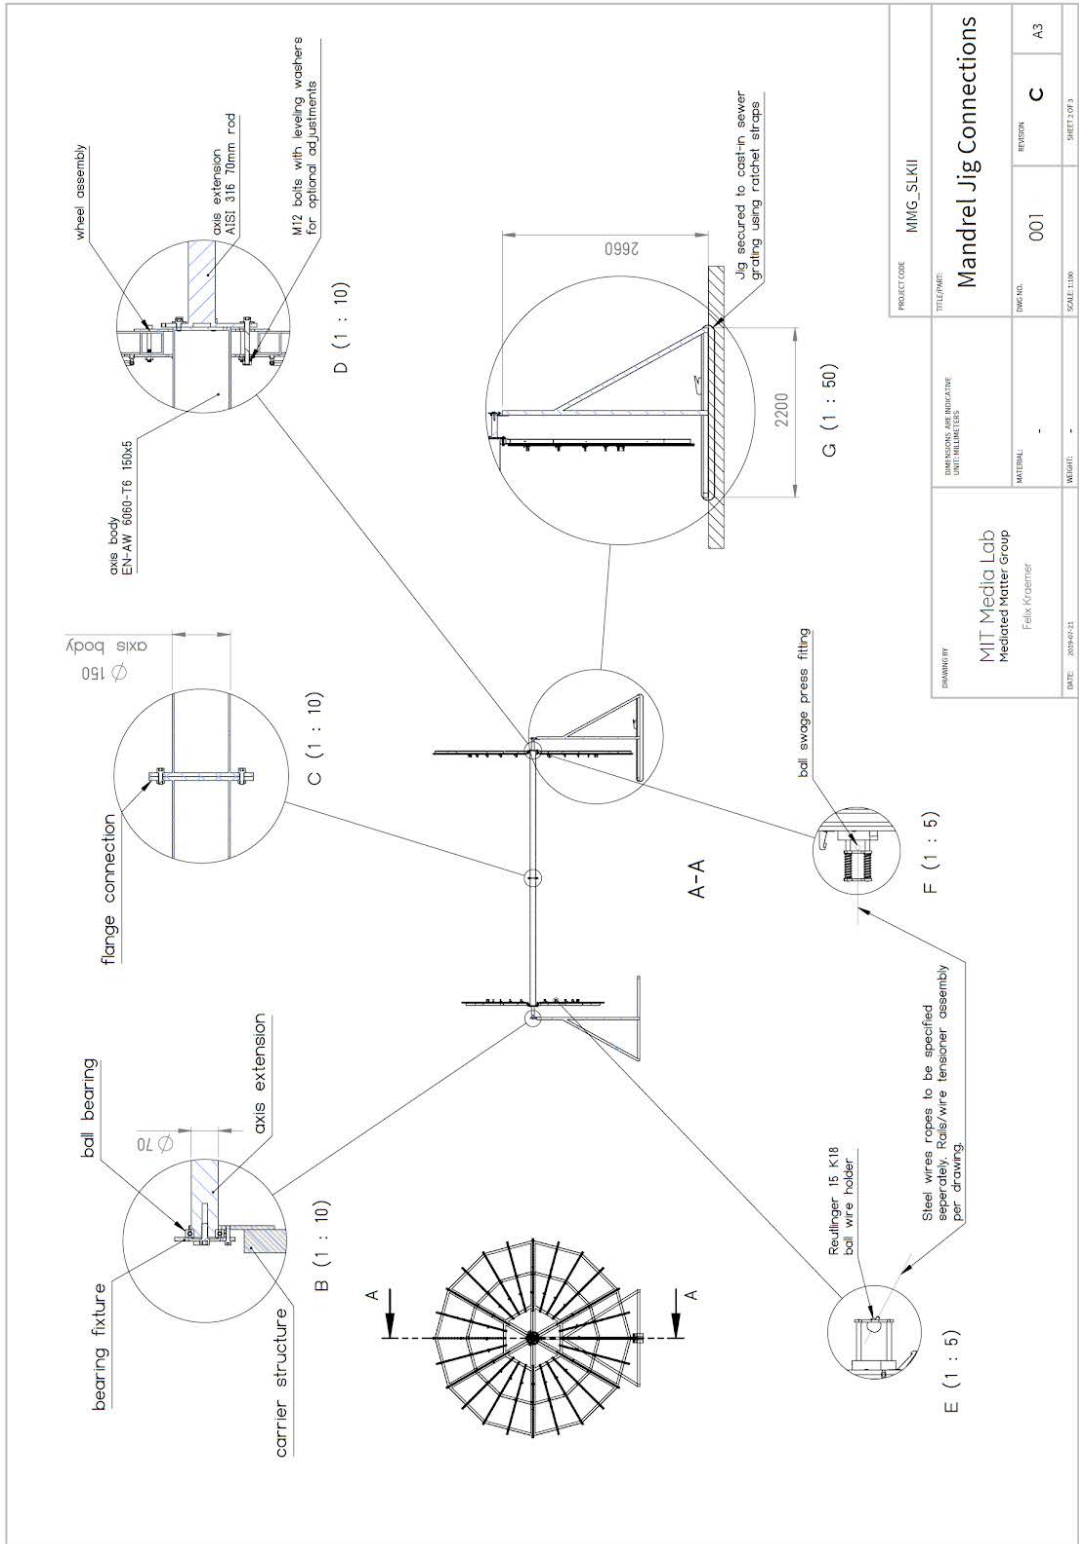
(b) Overview CAD Drawing of Platform: Connection Details
